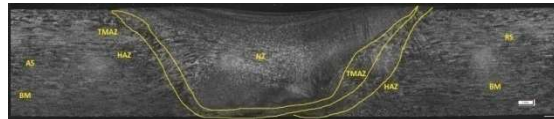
(a): Macrostructure of the FSW Weld Zone Obtained With Hexagonal Tool
